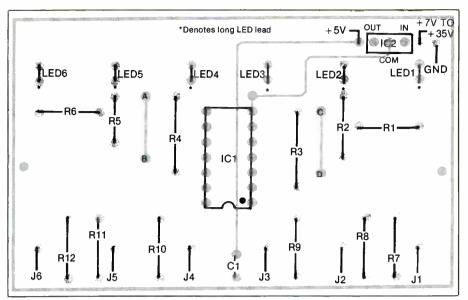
Wiring guide for pc board. Use this as a rough guide to component locations and layout if project is assembled on perforated board.
